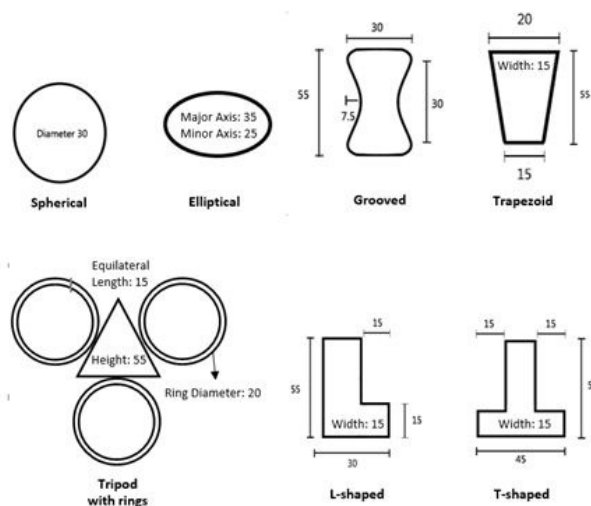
Dimensions of the grips used (All dimensions are in mm)
